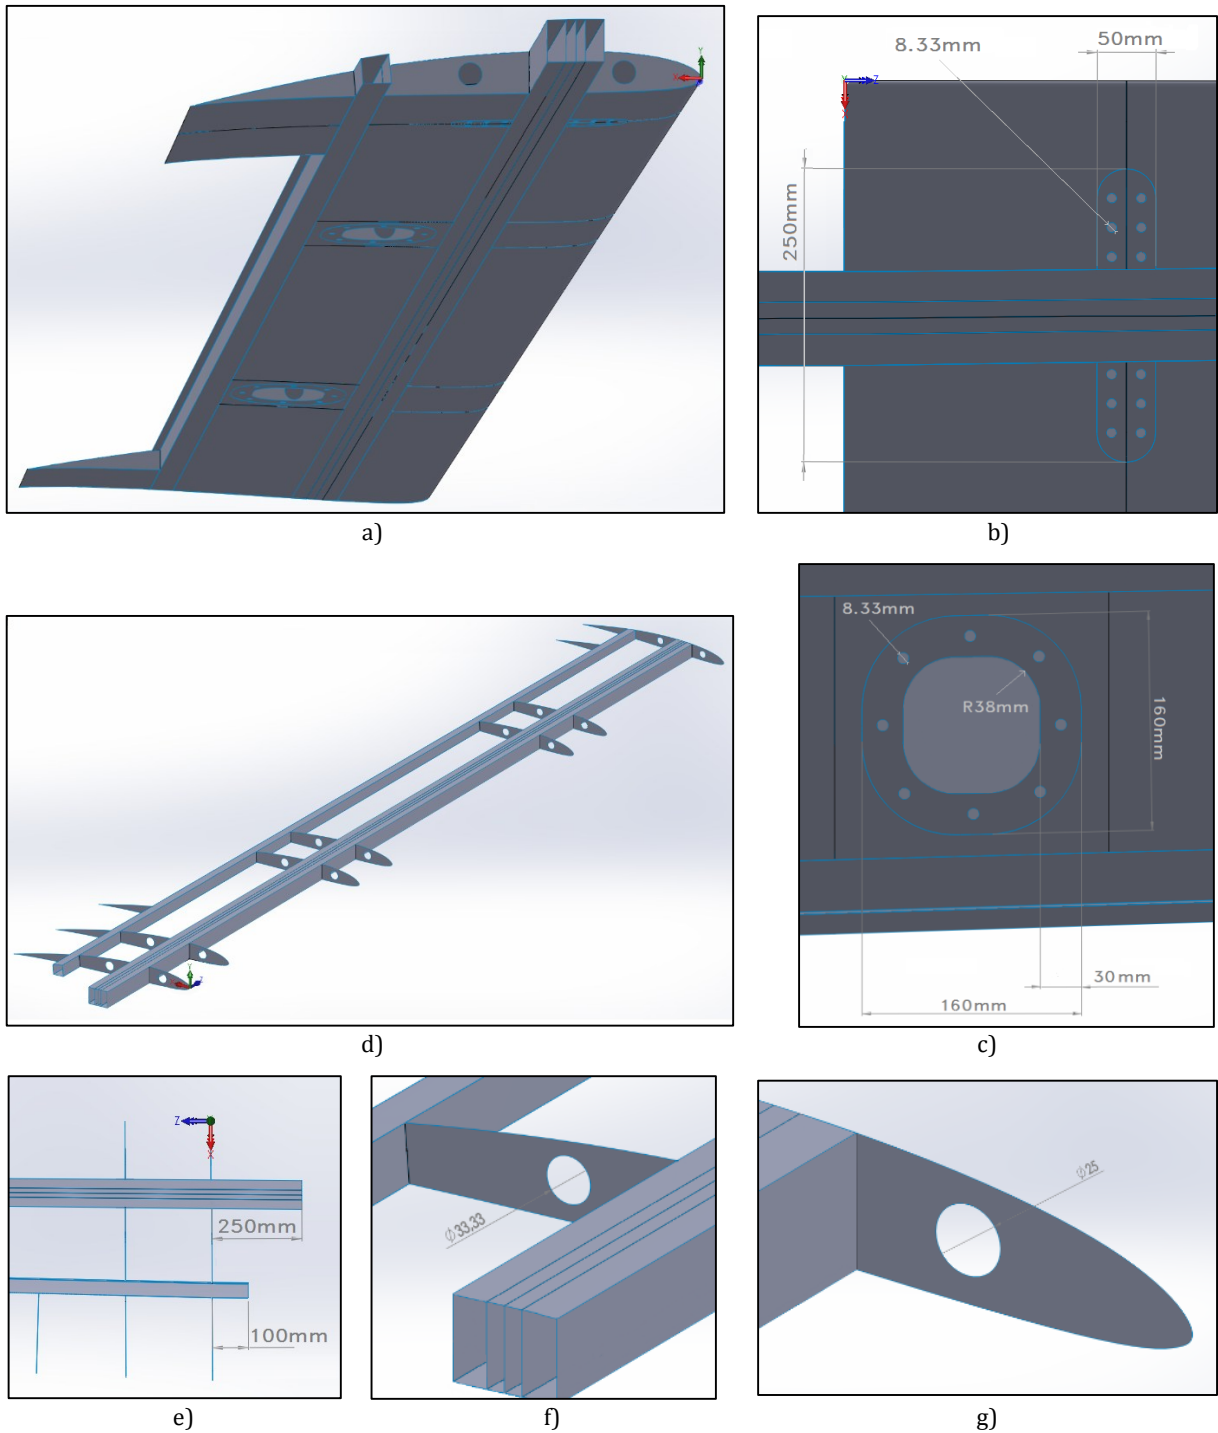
Wing structure initial model: a) Bottom view of the external surface (skin) with holes and cut-outs for the payload and servo motors; b) Detail: holes and surrounding contact area for payload bolted attachment; c) Detail: holes and surrounding area for servo motor 1 bolted attachment; d) Wing internal structure: two Spars and nine Ribs; e) Detail: root extension of the spars; f) and g) Detail: hole diameter of the rib at the root and tip, respectively.
